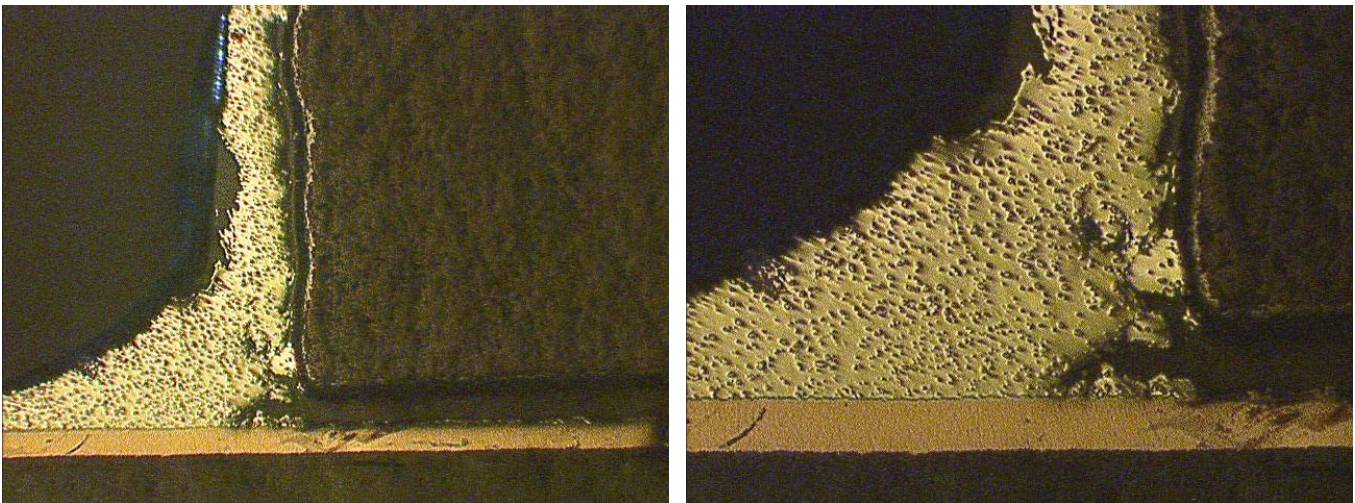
CLCC-20 Solder Joints, Board 104, Component U14, SN100C/SAC305, Failed @ 304 Cycles
